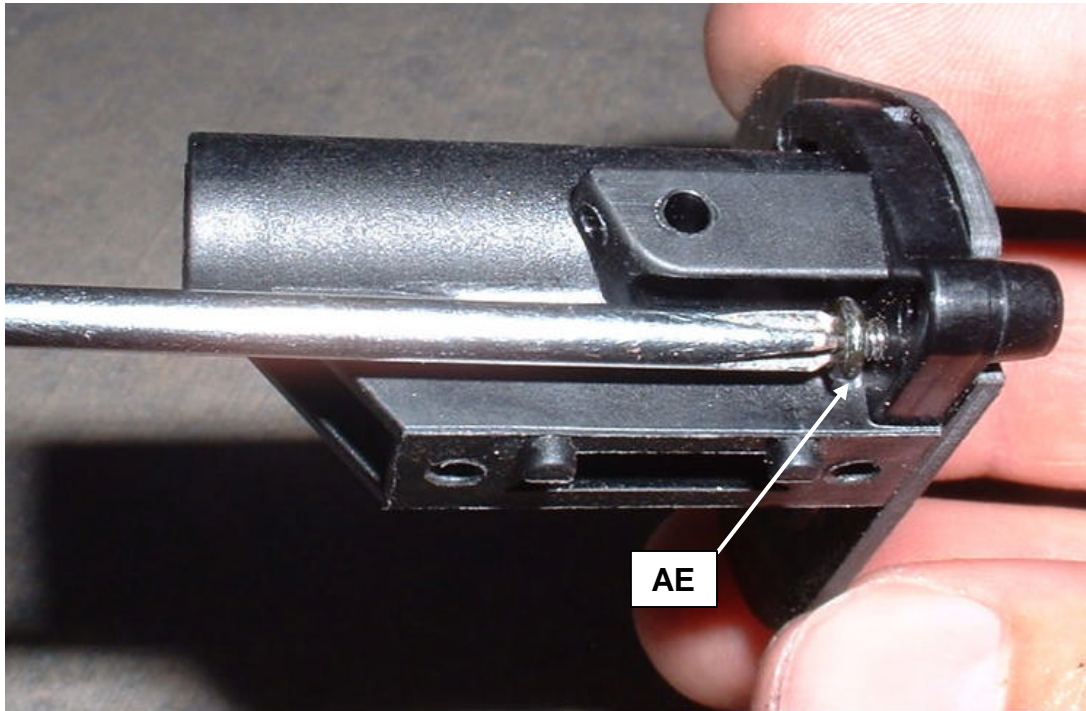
Screw the M2 x 5mm Phillips Pan-Head Motor Plate Screw [AE] into the motor plate as shown.
